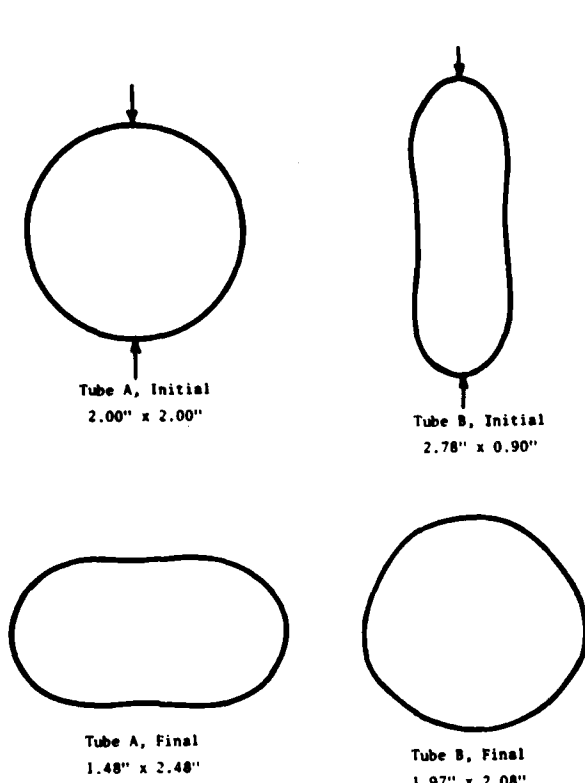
Tube A before and after first loading. Tube B before and after straightening.
